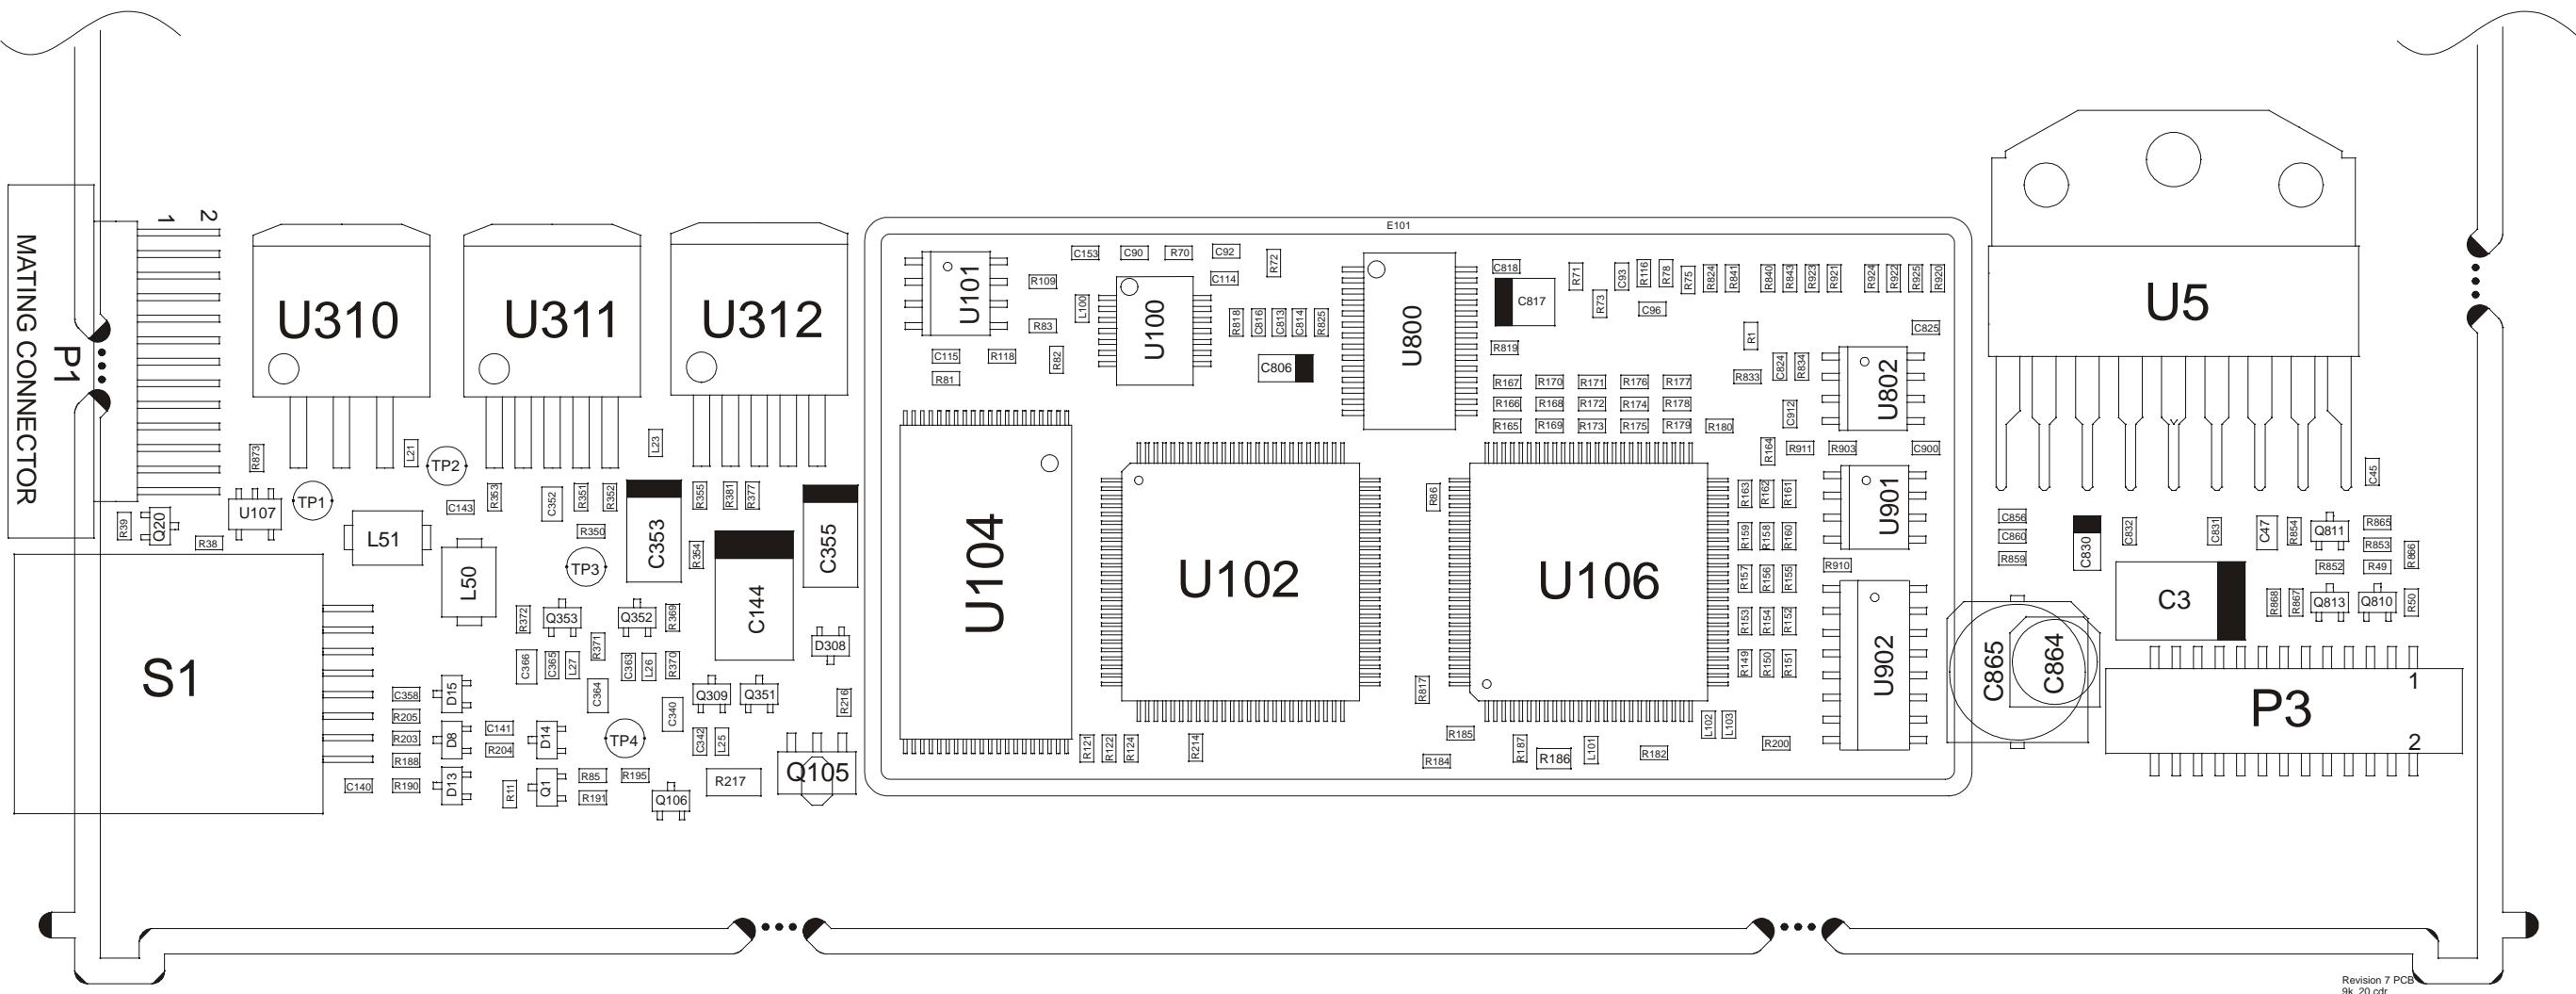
SRM9000 PCB Layout, Top (2/2)
